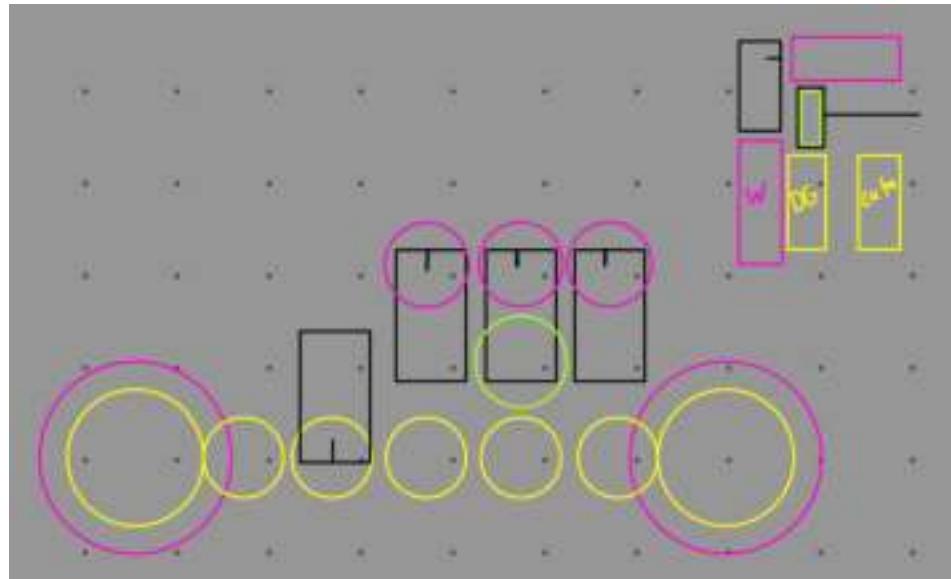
Basic layout of a PTO drive using 8 motors for driving and 6 motors for catapult or winch mechanism
